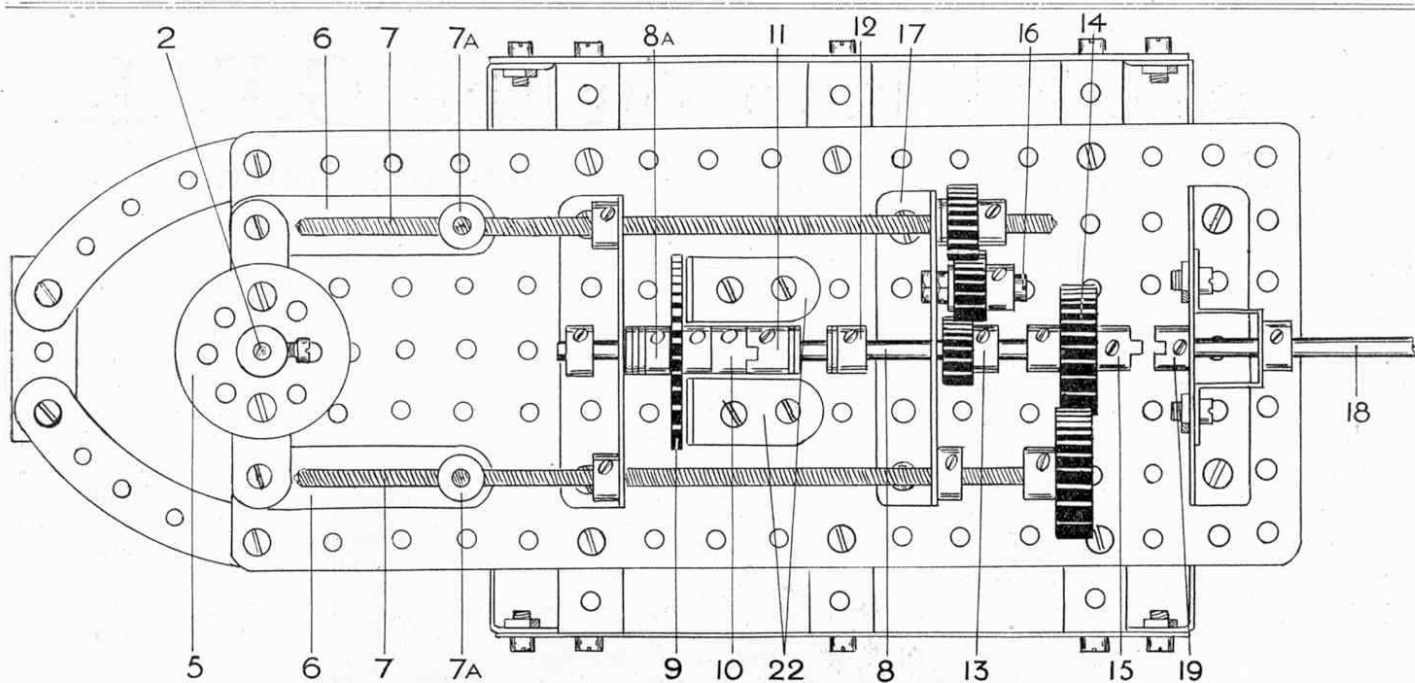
Fig. B. Plan of gearing, showing crosshead mechanism and clutch units, etc.
